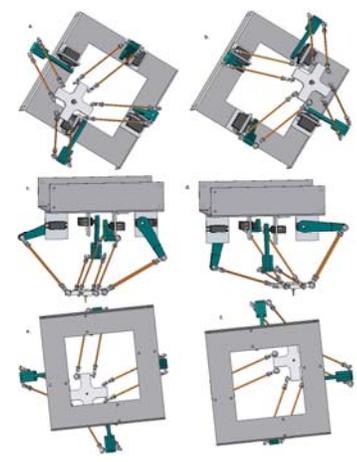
Simulation of laser tool head movement a,b Bottom views c,d Side views e,f Top views
